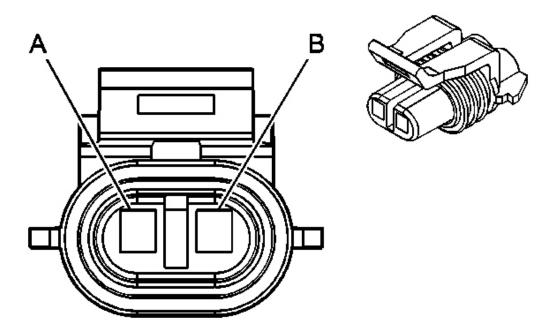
Wheel Speed Sensor (WSS) - Left Rear Connector End View Courtesy of GENERAL MOTORS CORP.
